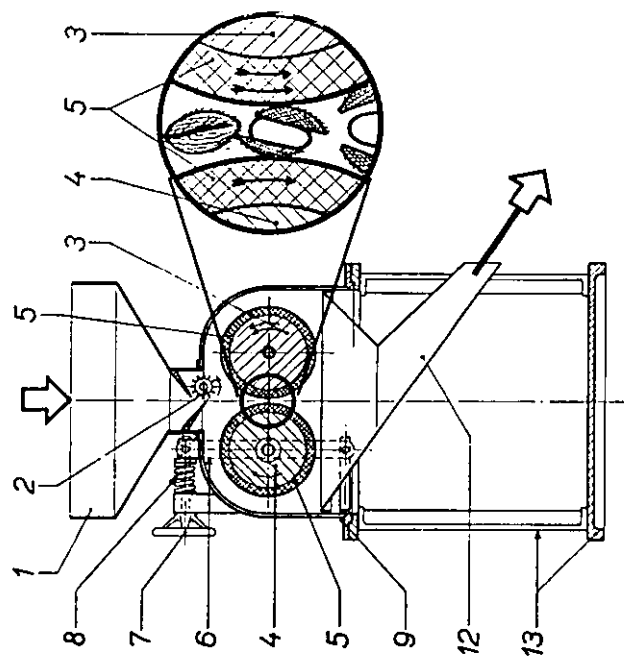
Rubber roll sheller. (1) Feed hopper. (2) Feed roller. (3) Fast roll. (4) Slow roll. (5) Rubber surface. (6) Roll shifting arm. (7) Roll clearance adjustment. (8) Roll tension spring. (9) Husker housing. (12) Husked rice and husk outlet. (13) Machine base and frame. Courtesy of Food and Agriculture Organization of the United Nations (Borasio and Garibaldi 1957).
